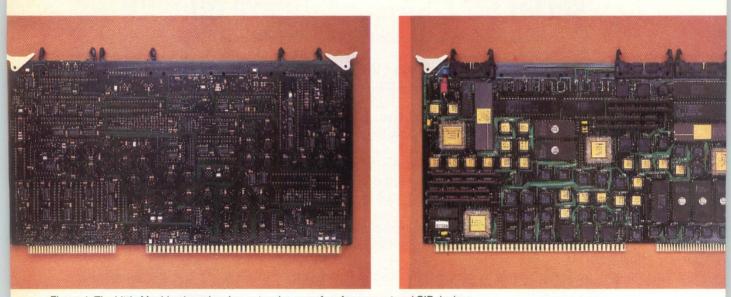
The Little Machine board makes extensive use of surface mount and SIP devices.
